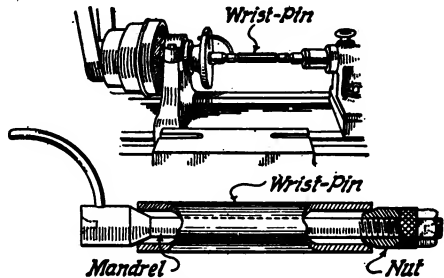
Tapered Mandrel for Holding Hollow Piston Pin for Lathe Work
